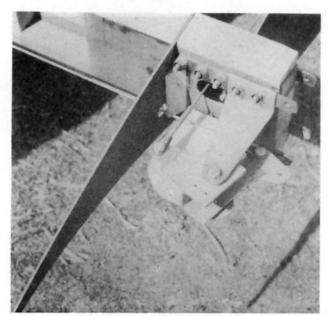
Aileron bellcrank assembly installed and rigged.
